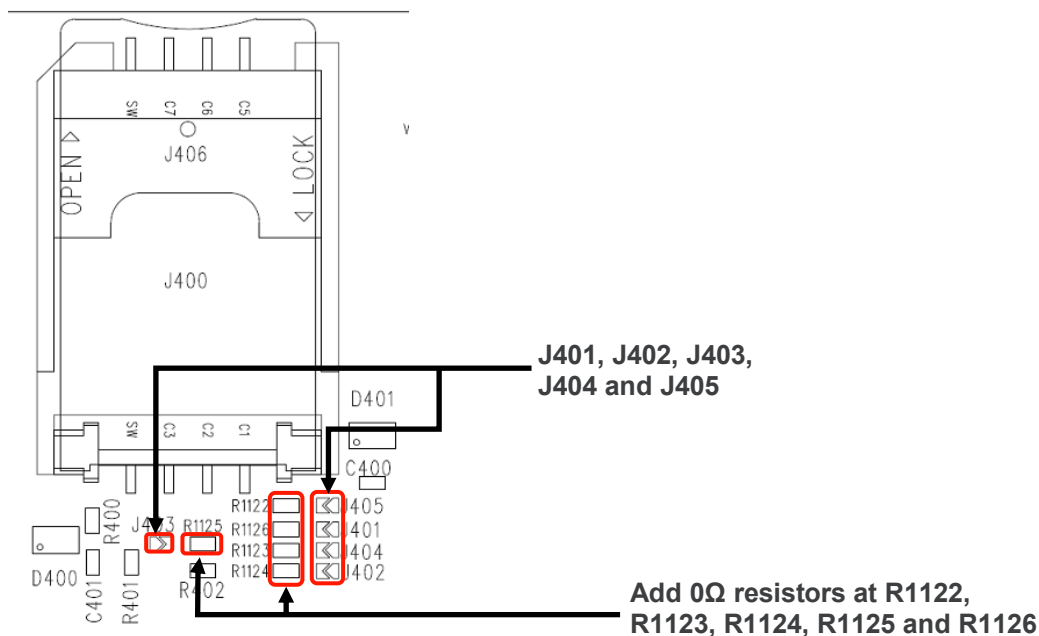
Solder Pads and Resistor Locations on the SIM Interface
